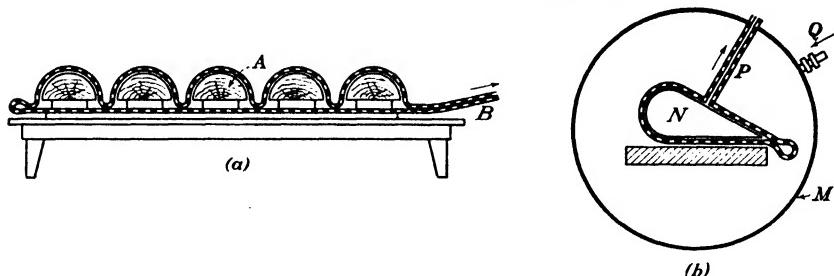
Flexible-bag molding techniques. (a) Molding with vacuum bags. A, solid wood pilasters to be veneer-faced. B, vacuum exhaust outlet. (b) Molding subassembly parts in vacuum tank. M, outer steel tank. N, subassembly inside rubber bag. P, vent to atmosphere or vacuum connection. Q, pressure connection for steam. (Courtesy of Resinous Products and Chemical Co.)
